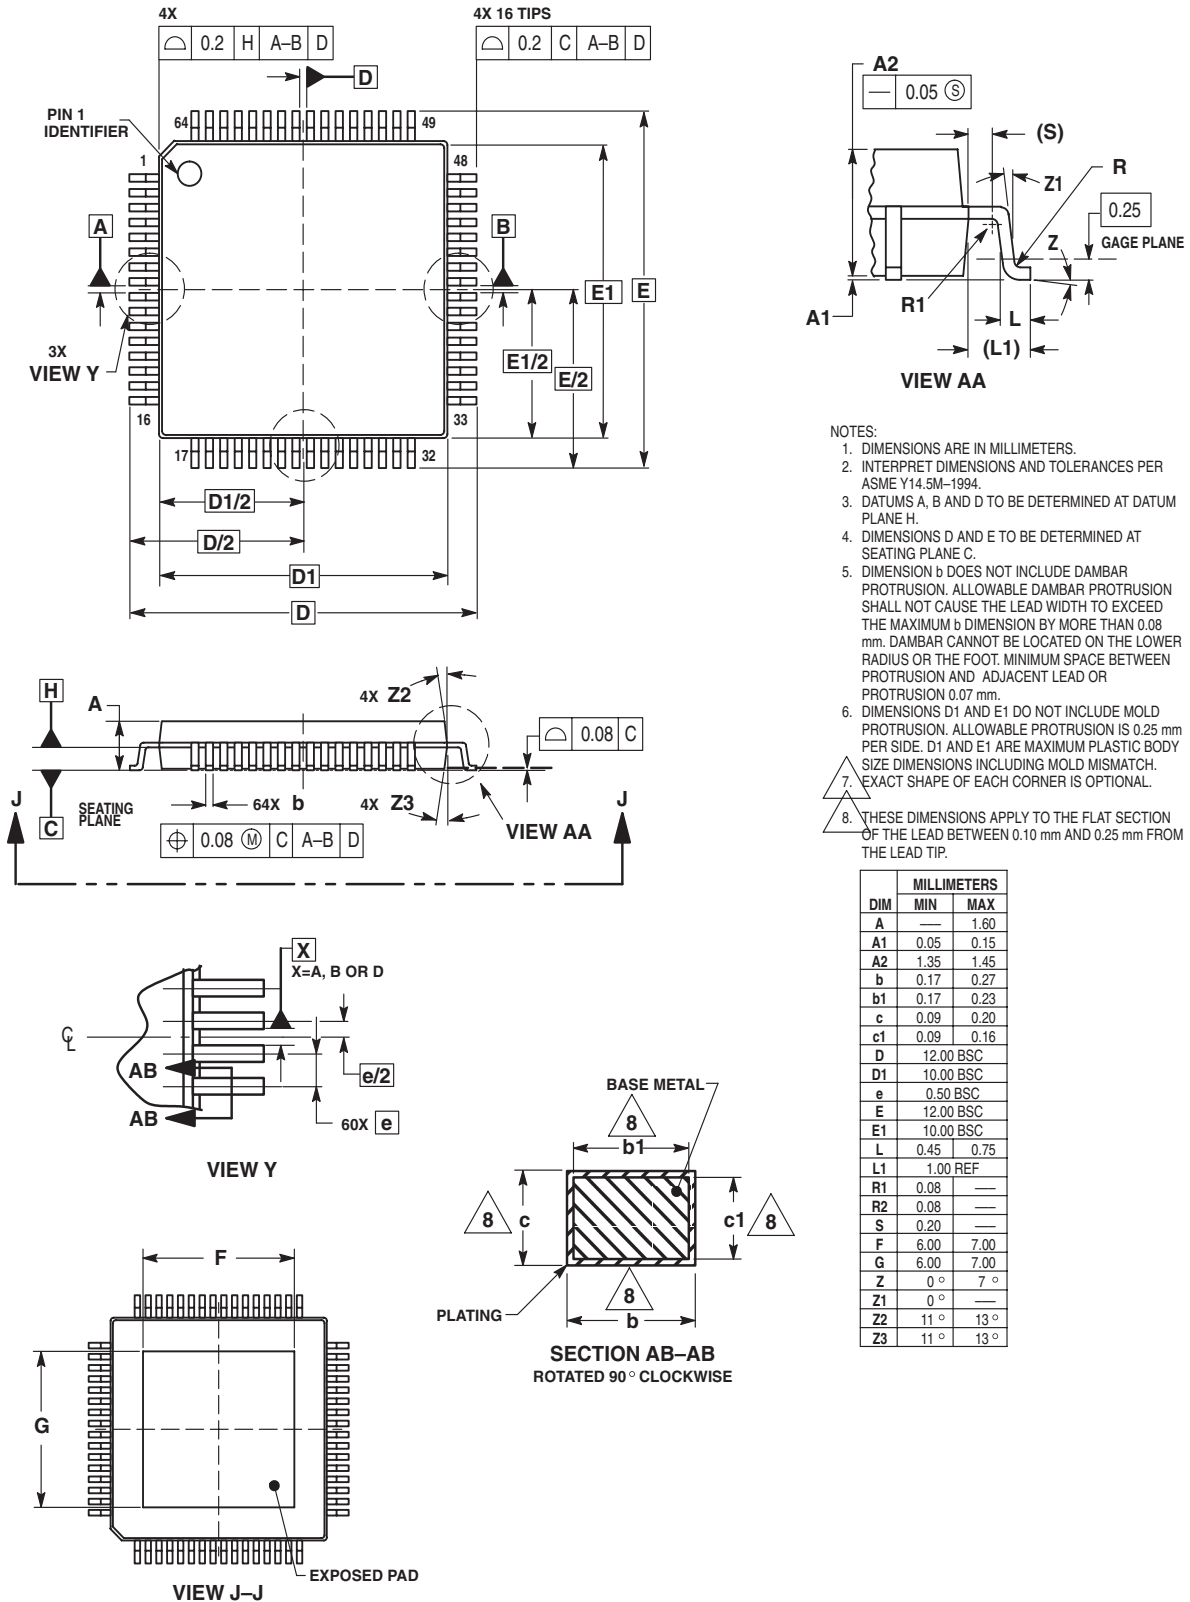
64-pin exposed LQFP Mechanical Dimensions (case no. 840K-01)
